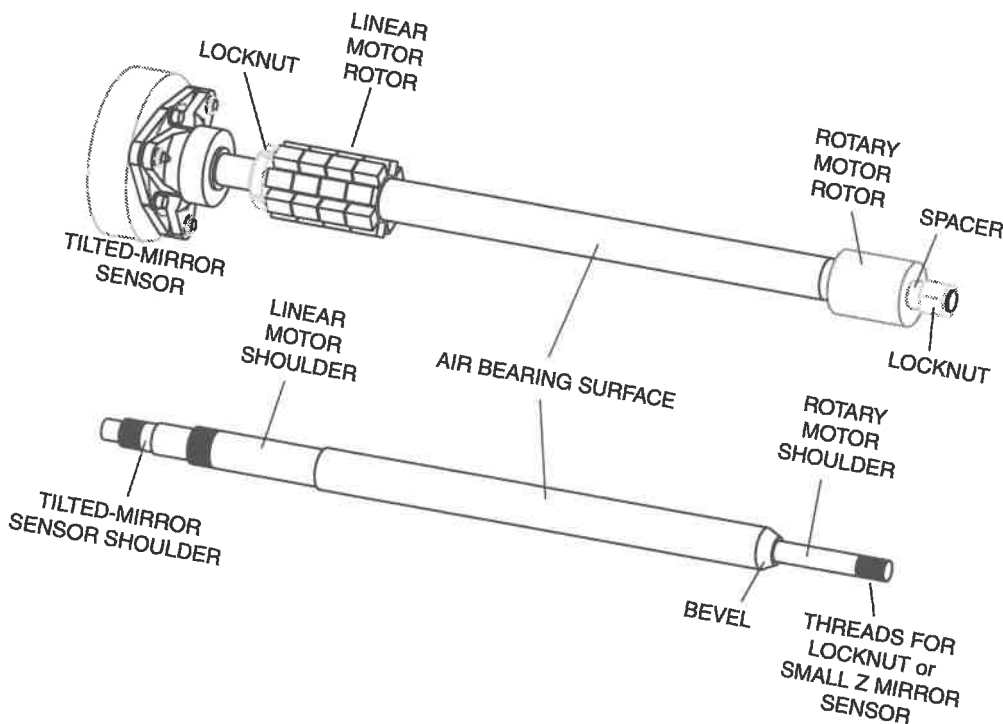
Prototype rotary-linear axis shaft geometry and assembled components. The motors are designed for high accelerations, and the masses and inertias of the moving shaft and attached components have been minimized. The magnetic rotors and mirror mounts are axially clamped to shoulders in the shaft. Thus, they can be disassembled and used on future prototypes.
